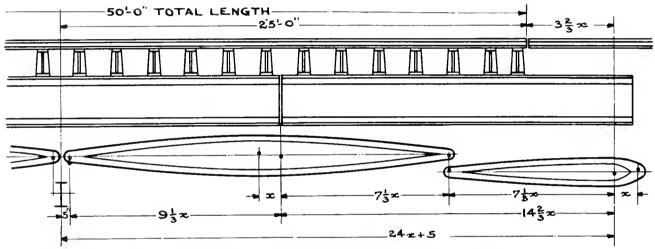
Diagram Showing Dimensions of Platform, Girders and Levers
